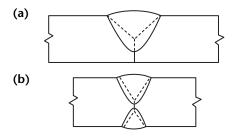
Partial joint penetration: (a) single V butt joint; (b) double V butt joint.
